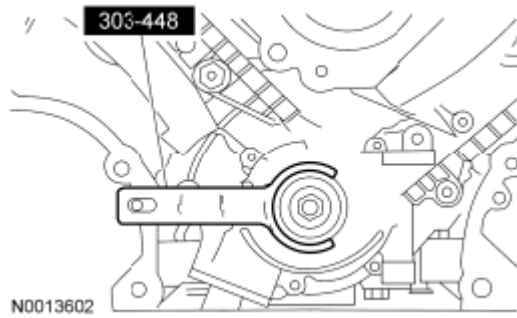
Identifying Crankshaft With Crankshaft Holding Tool
